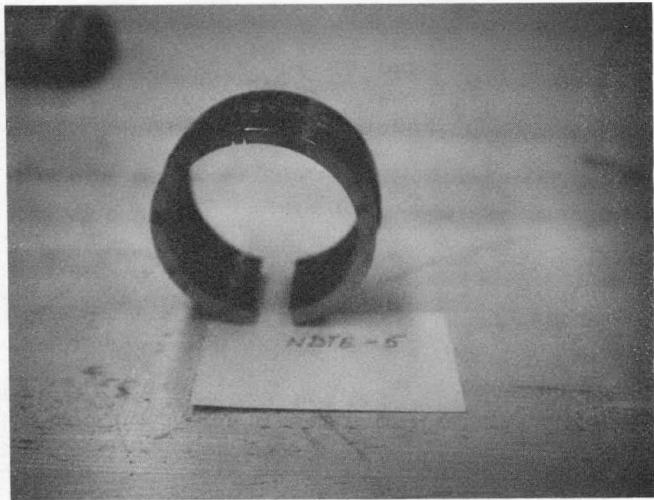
Pipe Specimens Used for Weld Inspection Study
